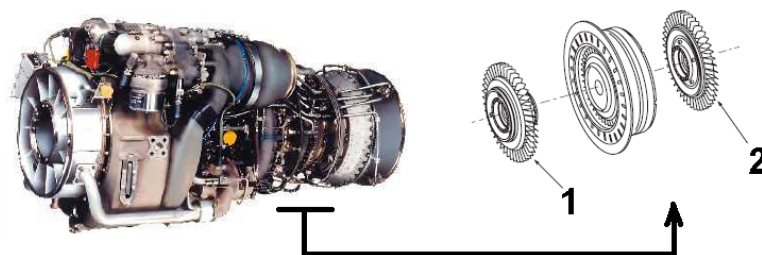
General view of the engine (left) and part of the gas generator turbine (right).
